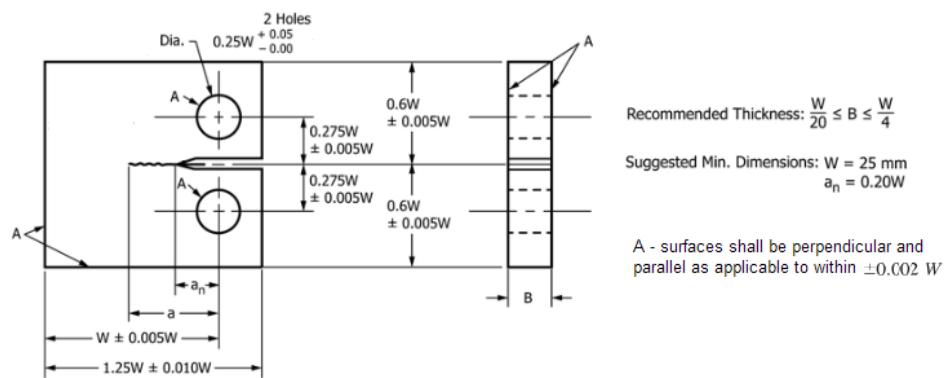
Standard CT specimen for performing fracture toughness testing
